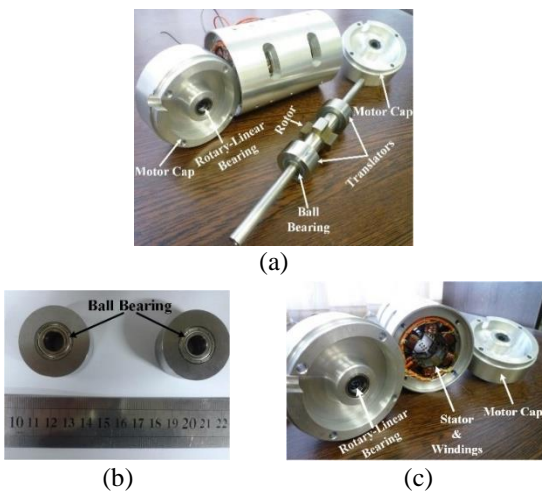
Constructed RLSRM structure: (a) motor parts, (b) translator structure, and (c) motor cap, stator and windings.
